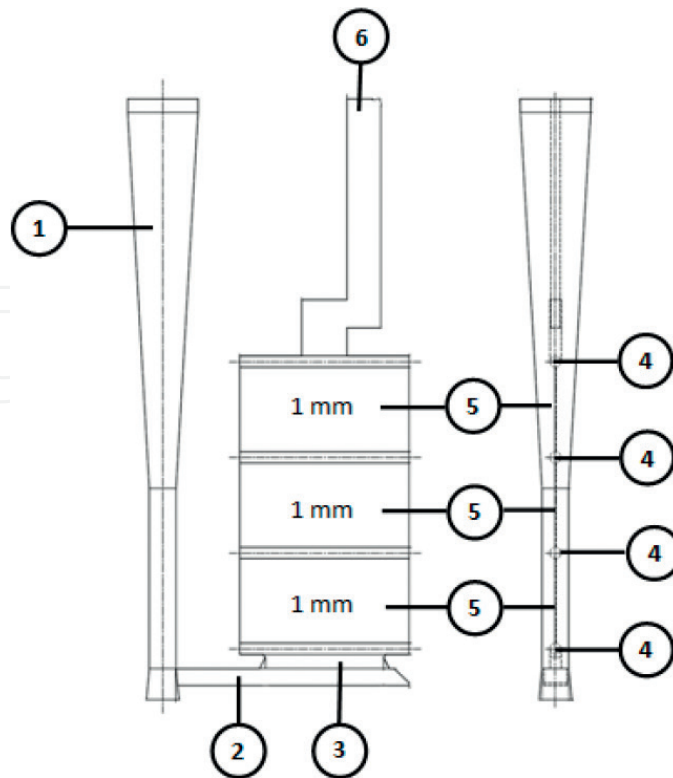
Improved design [34]. 1—Down sprue; 1a—supporting gate; 2—runner; 3—ingate; 4—riser; 5—plate; 6—gas tunnel.
